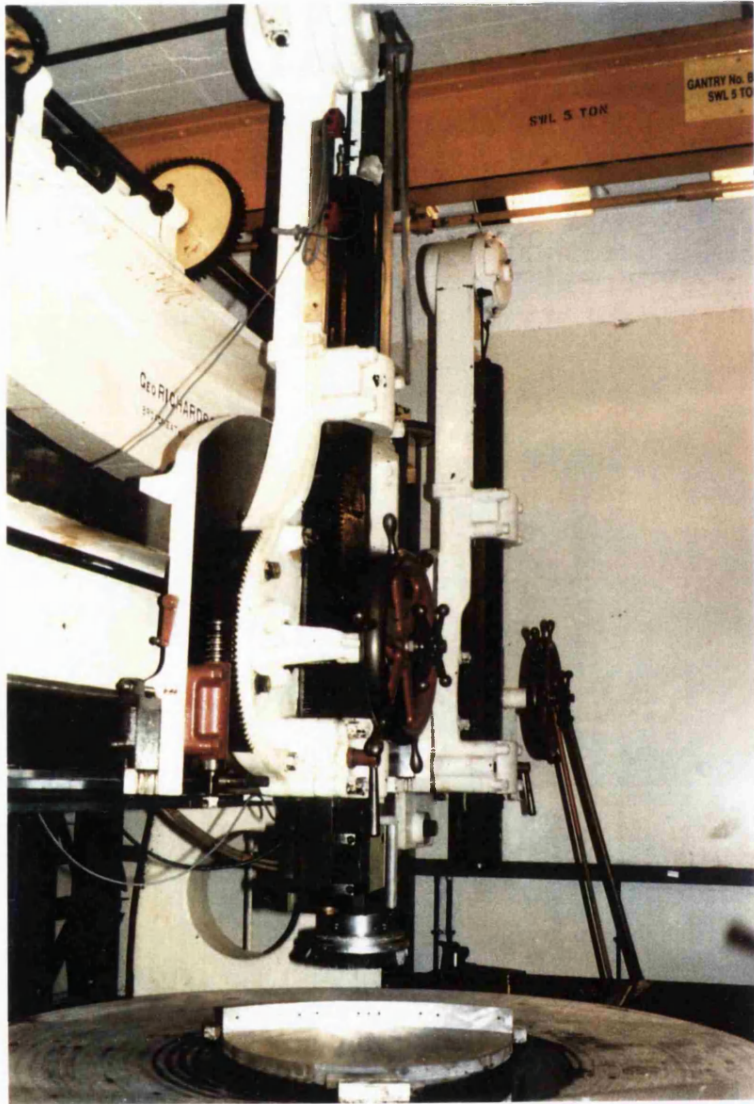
Photograph of the Grubb 8 ft grinding and polishing machine
